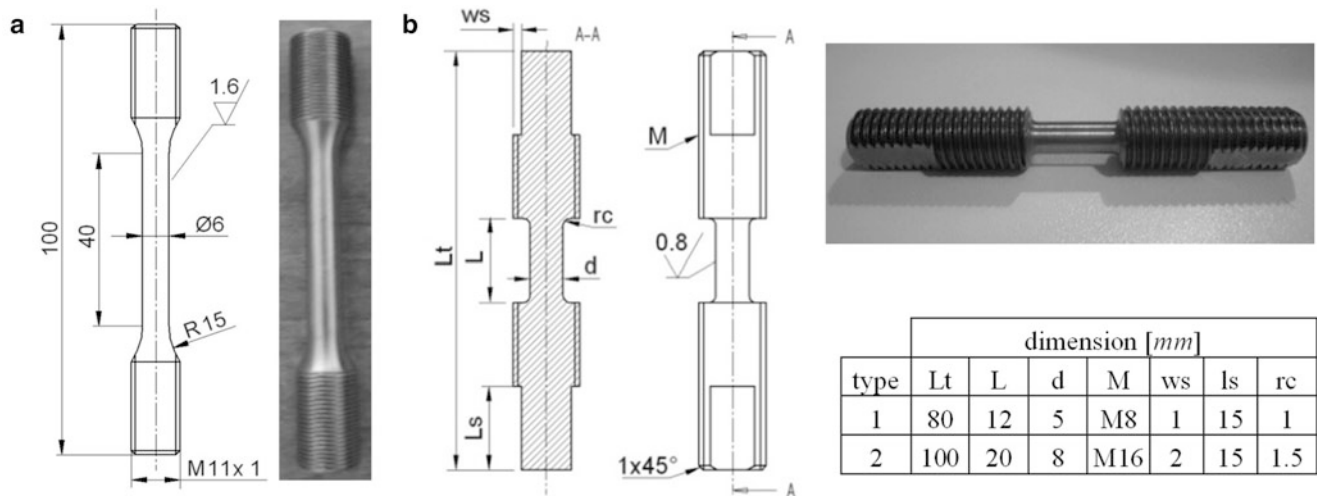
Specimen geometries: (a) tension test; (b) torsion test
